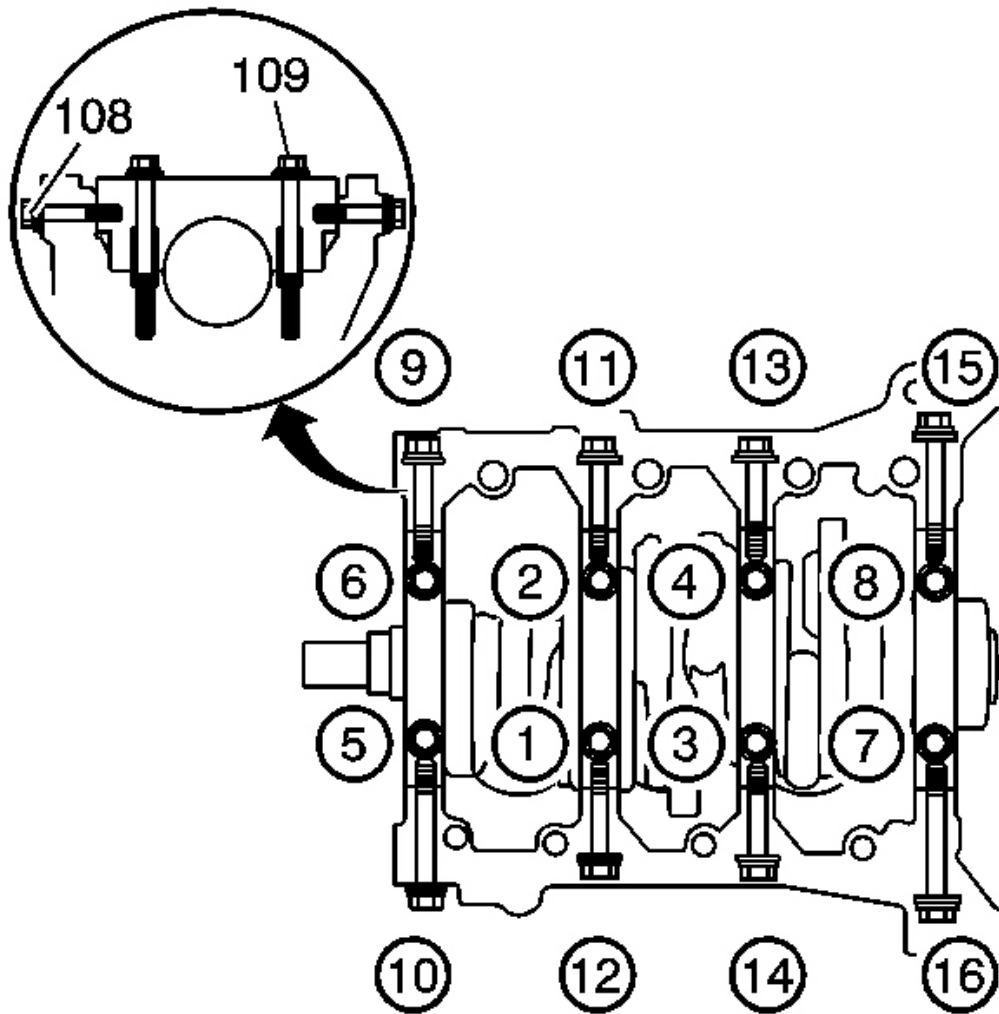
View Of Bolt, Threads & Flanges With Clean Engine Oil
